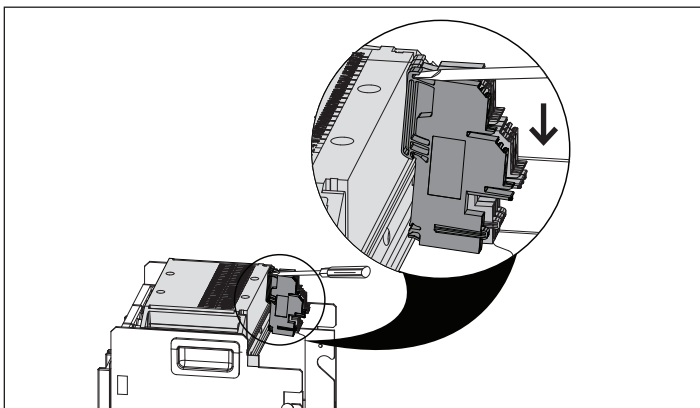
Removing the alignment bracket mount screws (NF frame).
